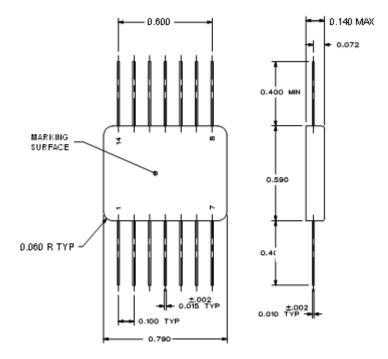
Models 1102 & 1108 Package Outline Tolerances: Unspecified = ±0.010"
